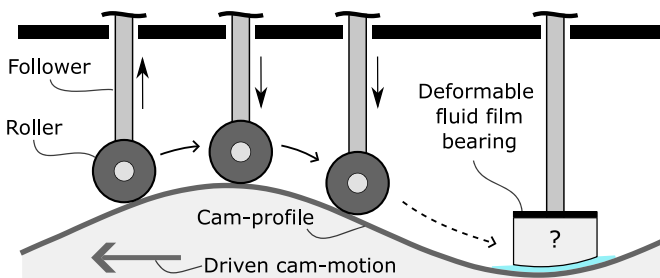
Schematic example of a functional wavy surface in a cam-follower system, with the desired transition to using deformable fluid film bearings.
